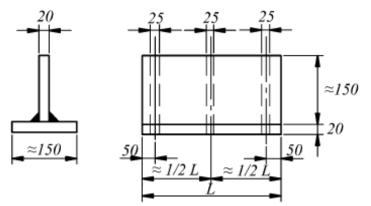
Tee-joint assembly for testing electrodes for fillet welding.
